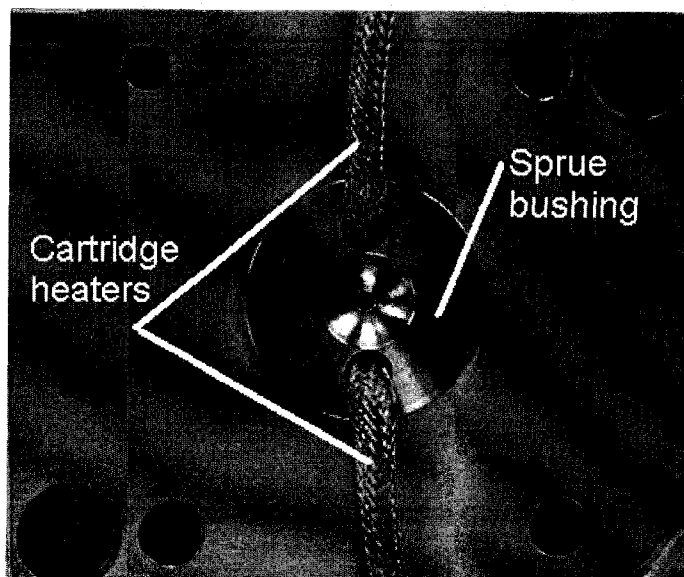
Digital photograph of the mounted sprue bushing on the fixed plate “A” of the base mold with two cartridge heaters inserted in the machined holes.
